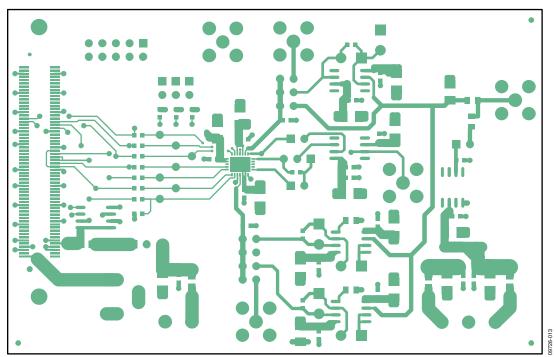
Top Printed Circuit Board (PCB) Layer Schematic
